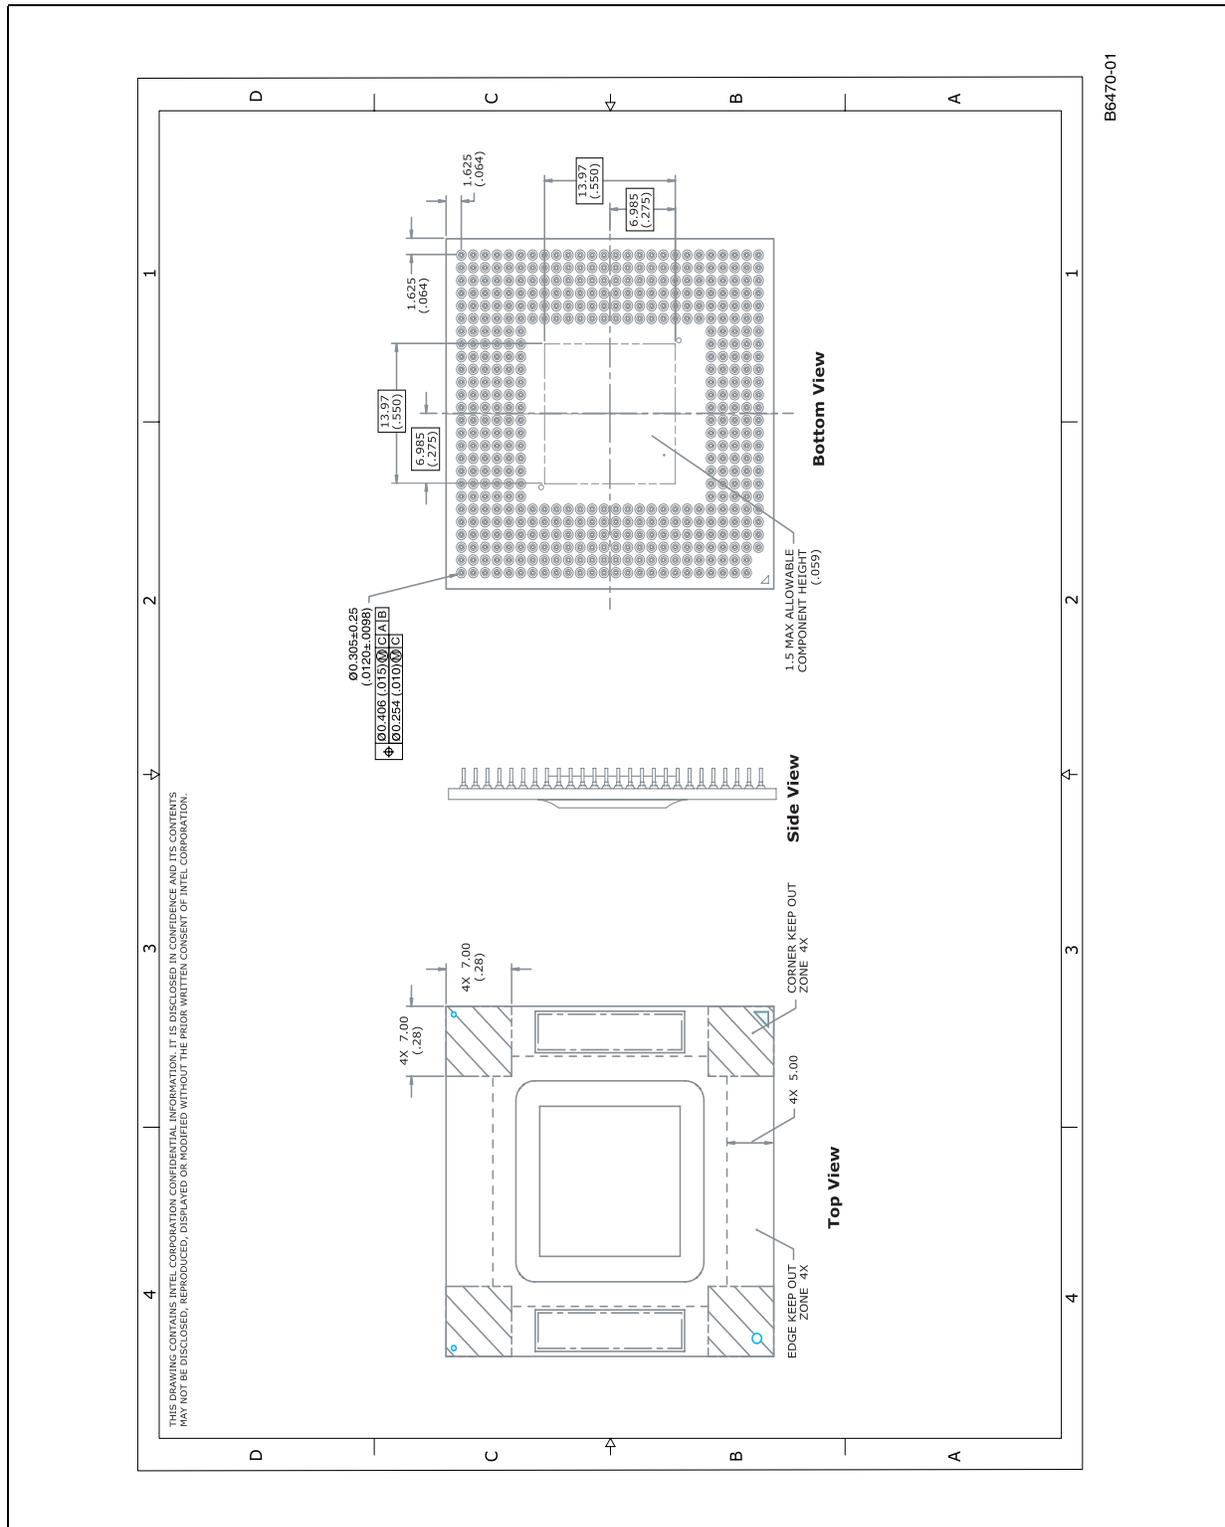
Micro-FCPGA Processor Package Drawing Sheet 1 of 2
